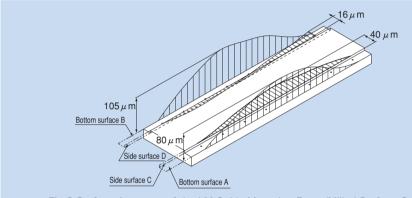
Surface Accuracy of the LM Guide Mounting Base (Milled Surface Only)
